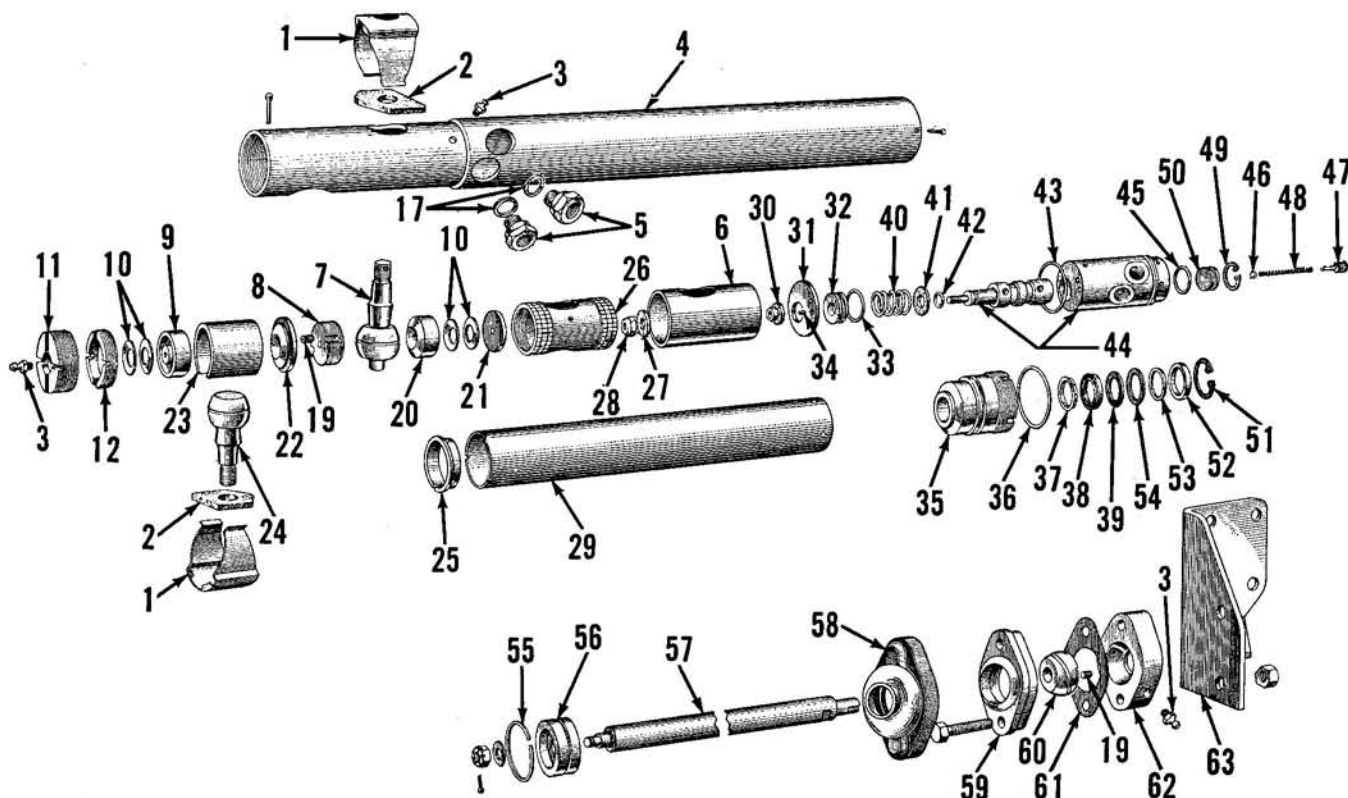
Exploded view of early production power steering control valve and cylinder assembly. Refer to Fig. 15 for exploded view of later unit. Unit shown is for wide adjustable front axle models; cylinder on tricycle model is smaller in diameter.
